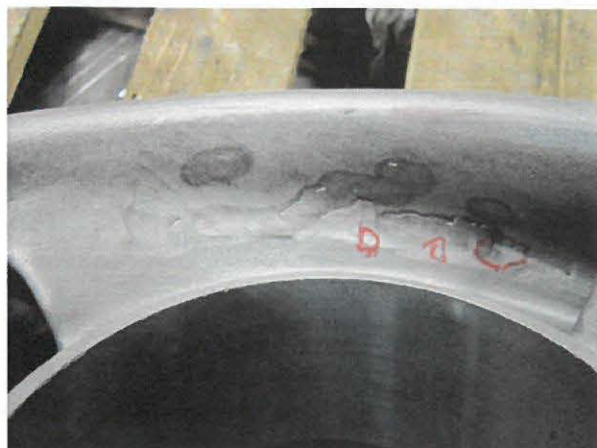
Previous weld repair on 1st Stage Impeller
